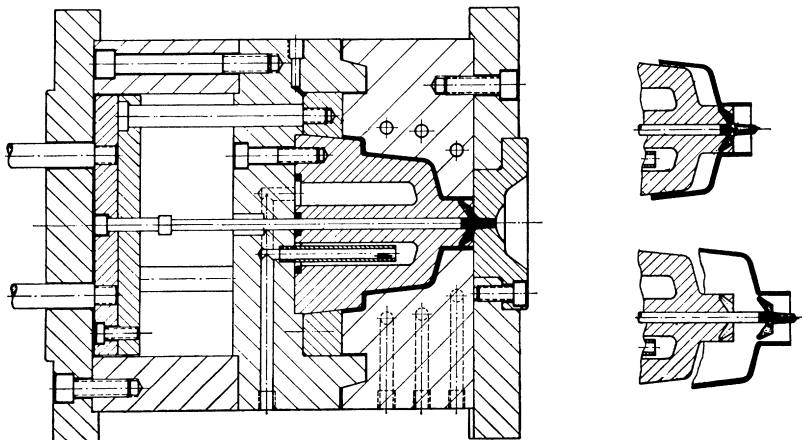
Mold with tunnel gates for molding covers [6.8]
